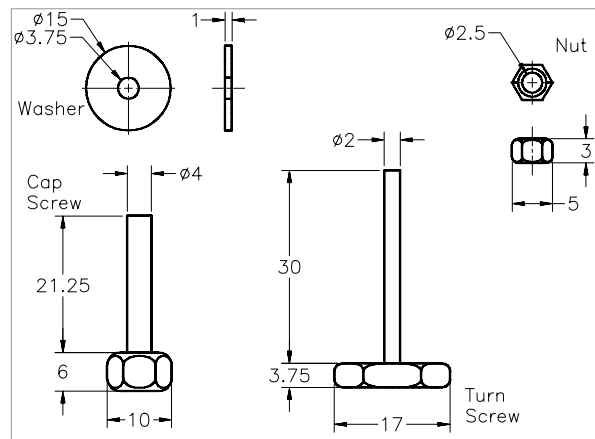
Dimensions of the Washer, Cap Screw, Turn Screw, and Nut
